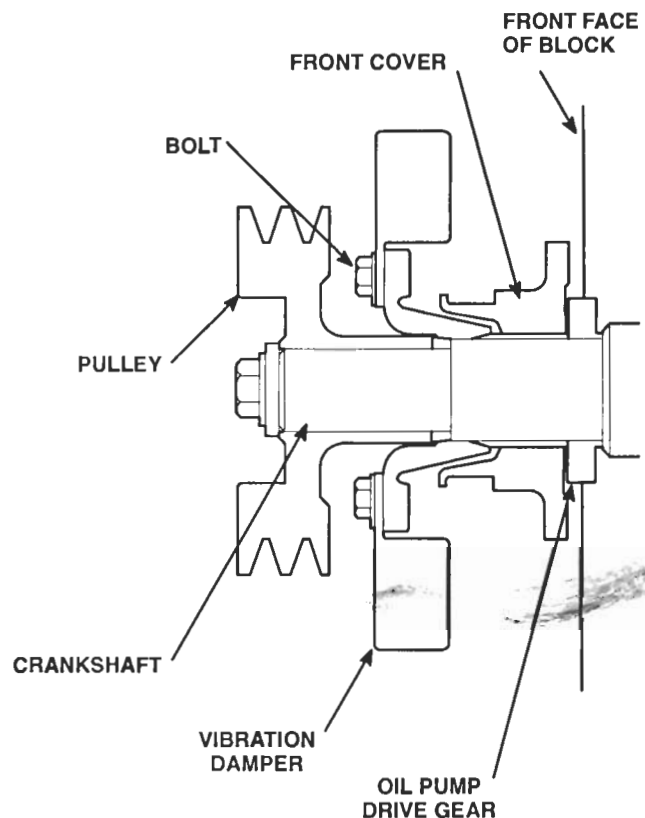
Crankshaft Cap and Double Vibration Damper Mounting
